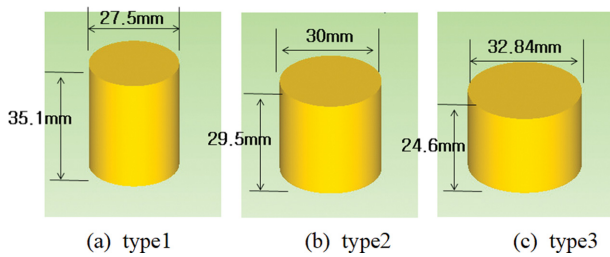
Configuration of initial billet dimensions for spring retainer forging.
